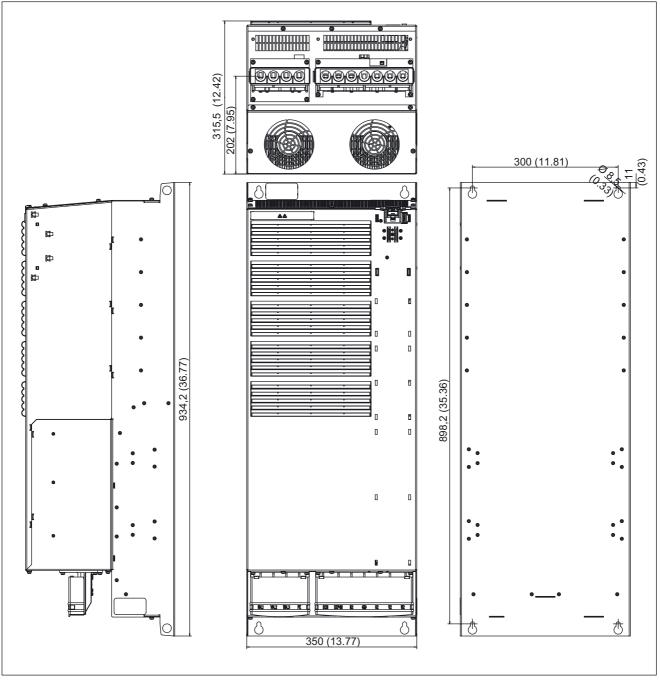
Dimension drawing: Power Module PM340 with integrated line filter, frame size FSF
